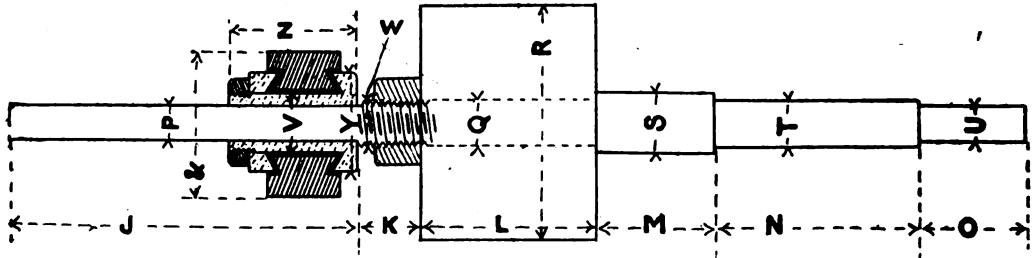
ARRANGEMENT OF COMMUTATOR AND ARMATURE ON SHAFT.
